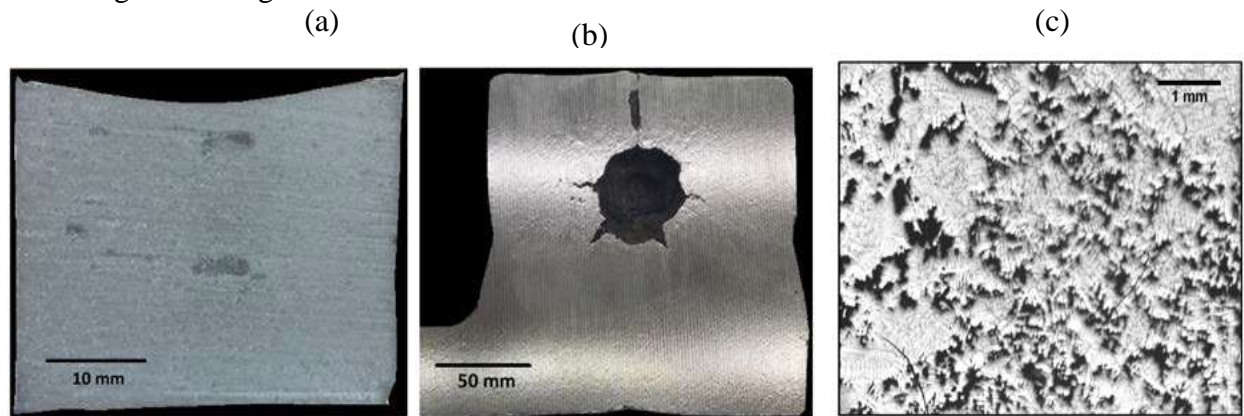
Surface sink and porosity defects caused by shrinkage:(A. Reis, Z et al,2012): (a) surface depression or surface sink, (b) external shrinkage porosity defect, (c) internal shrinkage porosity.
